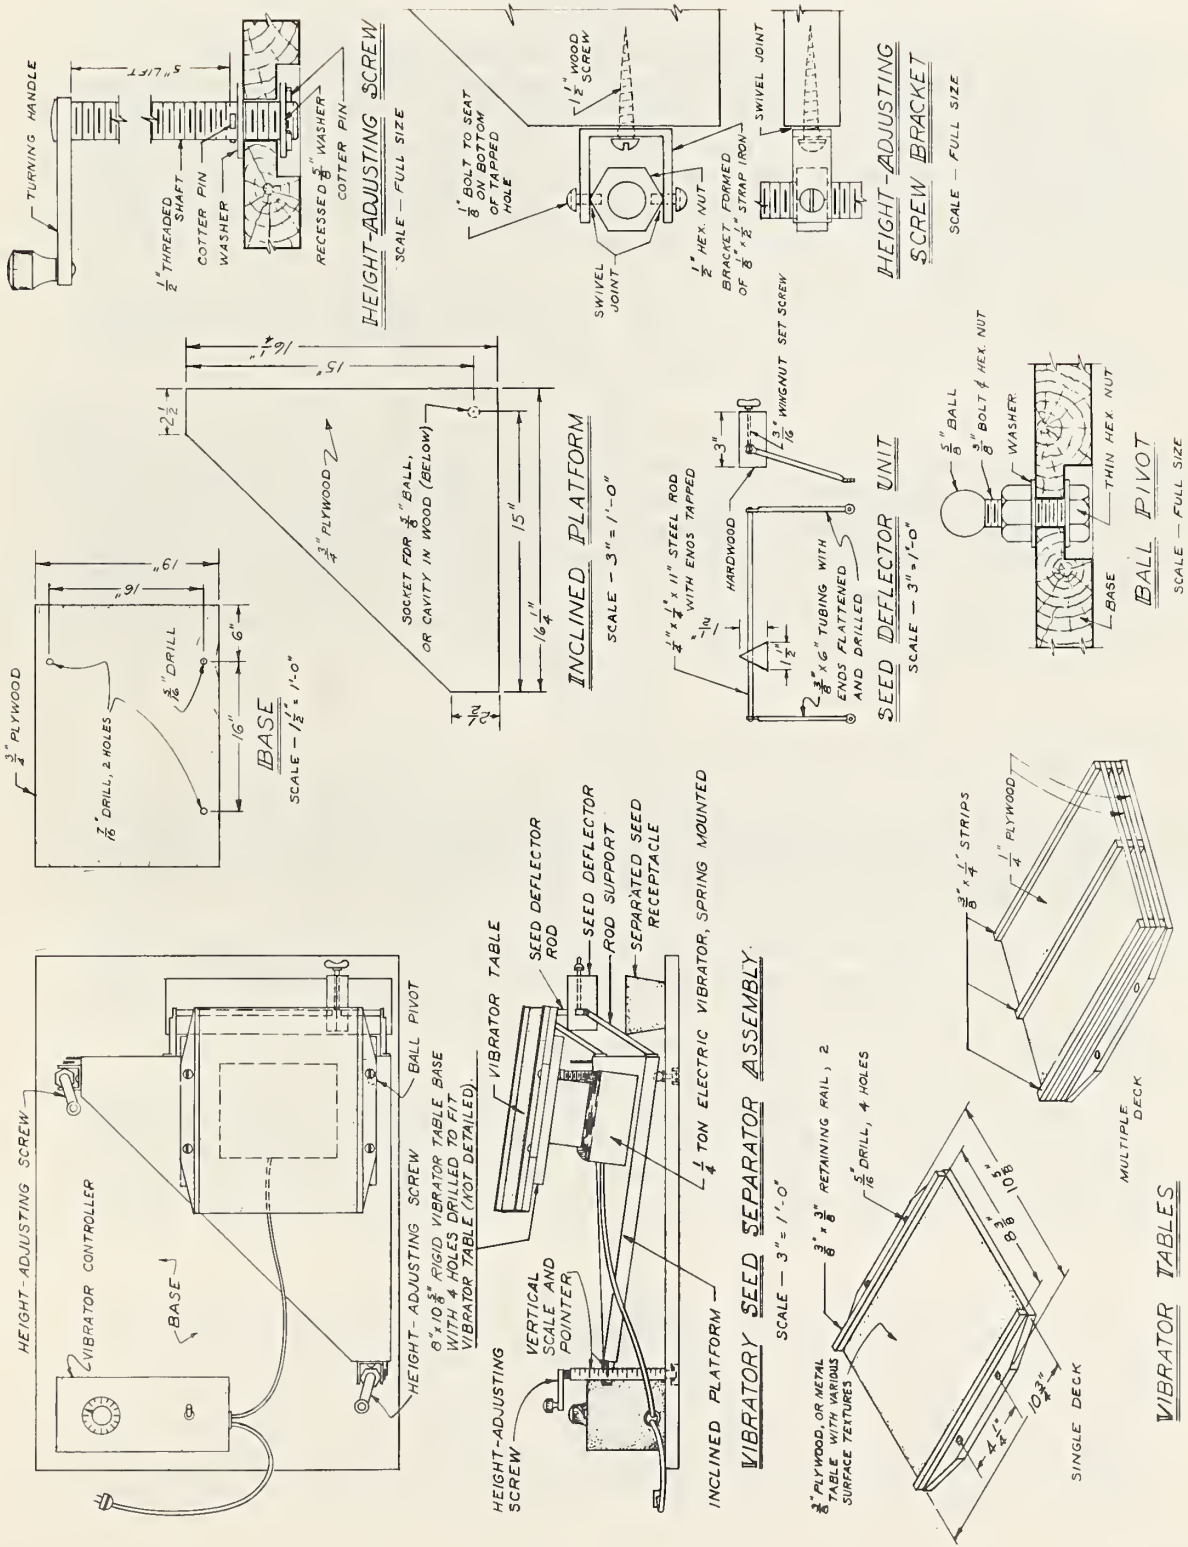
Detail drawing of vibrator seed separator. No. 1003-1-60.
